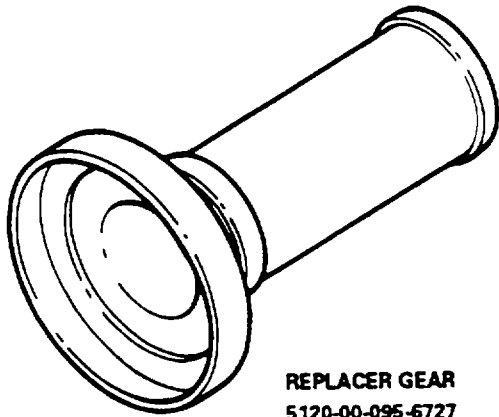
Special Tools and Equipment - Multifuel Engine (Sheet 2 of3).
